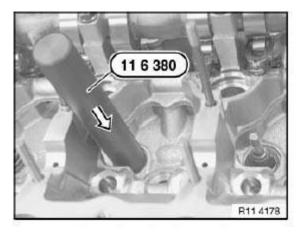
Identifying Special Tool 11 6 380 Courtesy of BMW OF NORTH AMERICA, INC.
